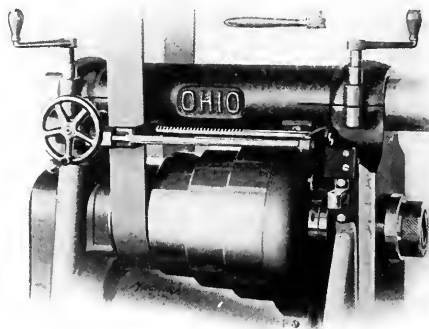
Belt Shifting Mechanism on Oesterlein Millers
